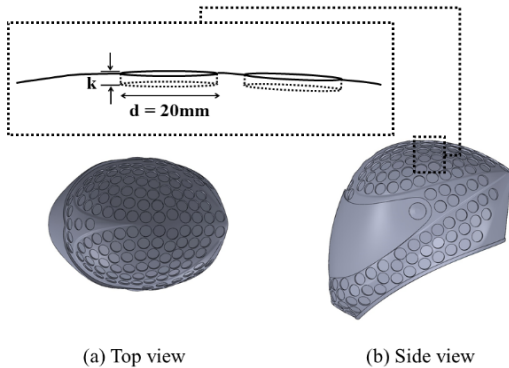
(a) Top and (b) side views of the helmet model with dimples.
